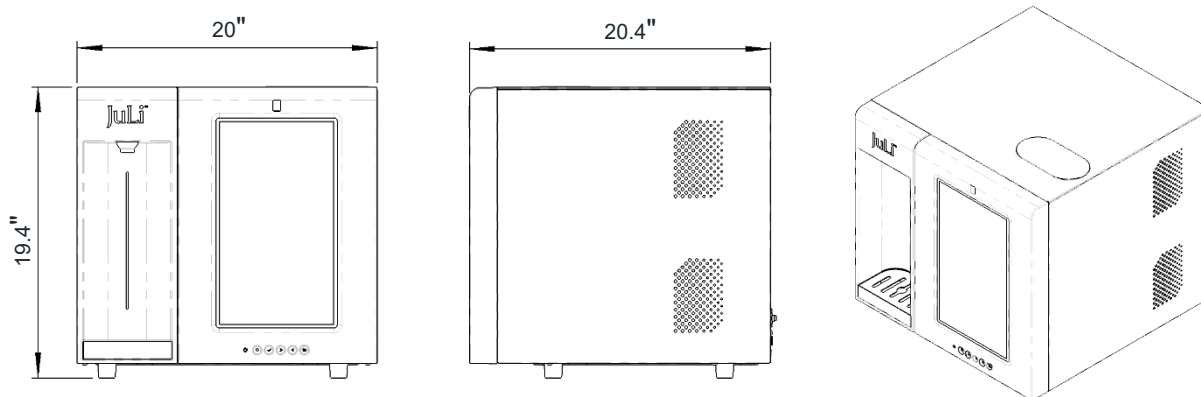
Front, side, and isometric dimension views – 19.4" H × 20" W × 20.4" D (492.6 mm x 508.5 mm x 519.2 mm).
